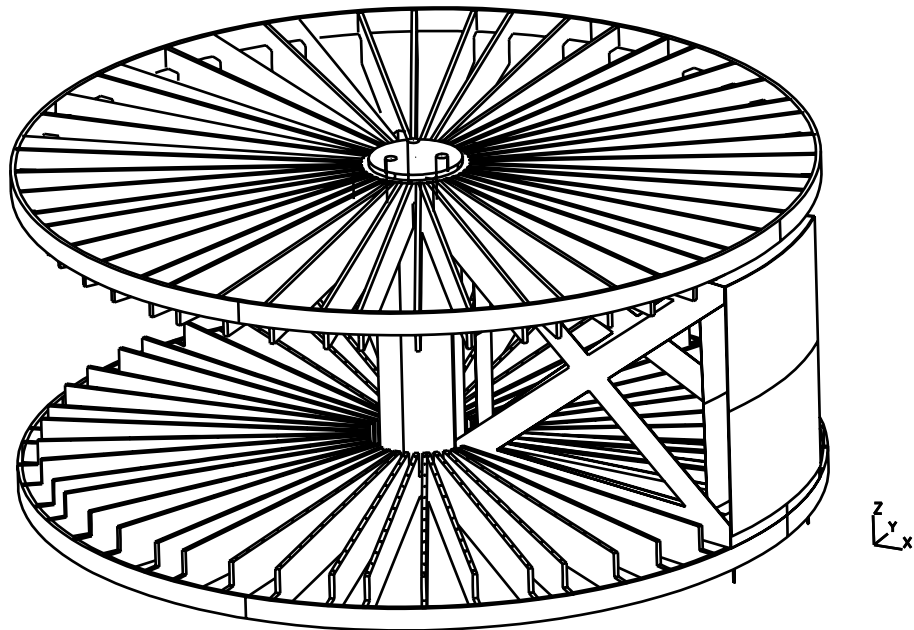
Jack Flight Unit into Bottom Tooling and Install Top Tooling
